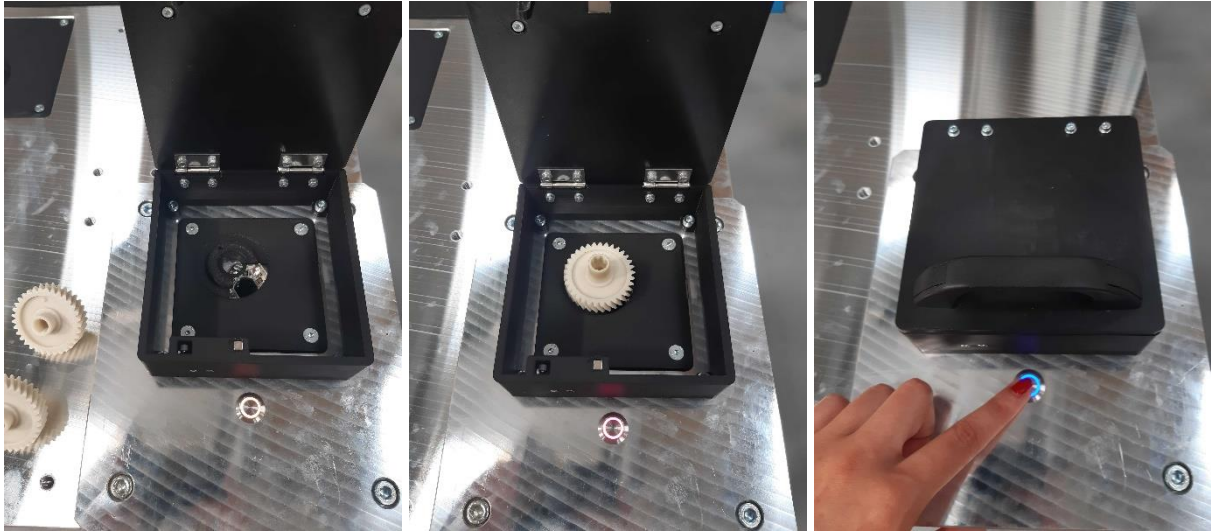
Handling for measurement process of tracer-based gear wheel, from left to right: Open cover → insert gear wheel into fixture → close cover → press button.
